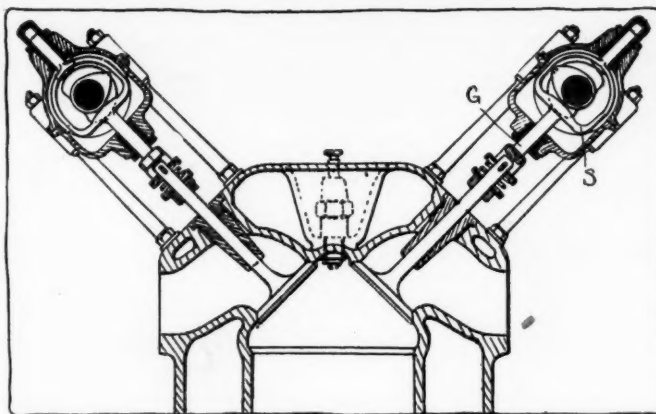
Delage arrangement with sixteen inclined overhead valves operated by cams.
